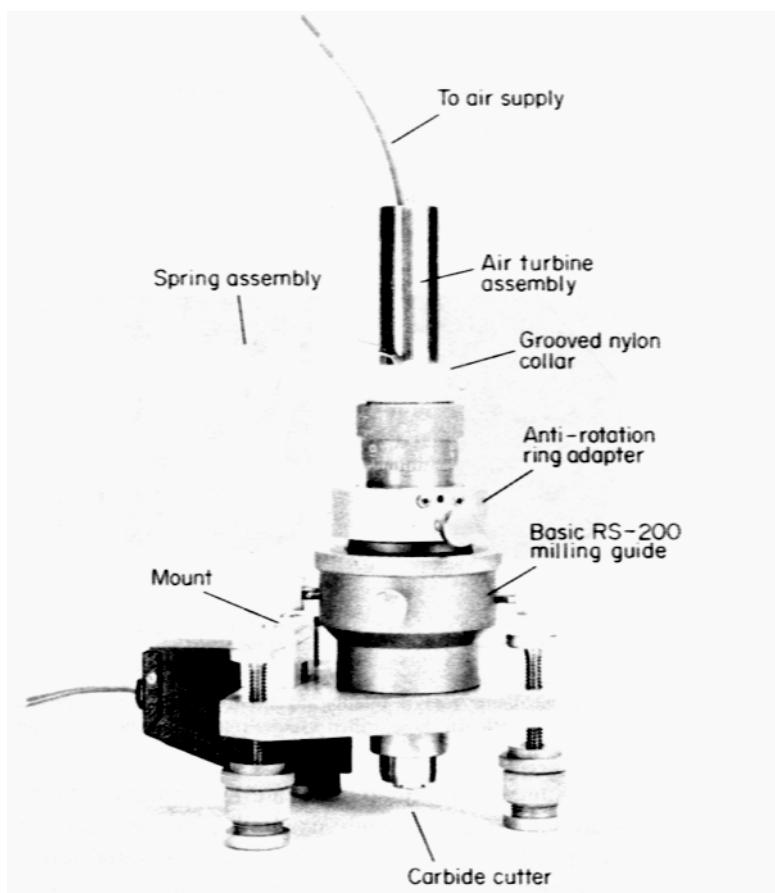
Equipment used for the hole-drilling technique of residual stress measurement.
